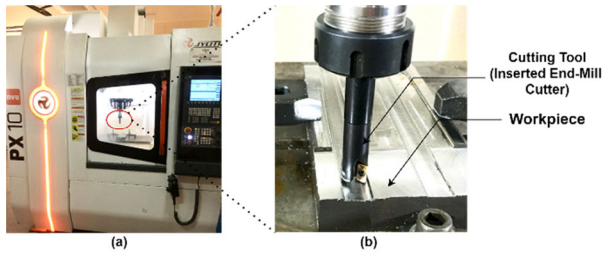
Milling setup (a) Milling machine (b) Milling process (cutting tool and workpiece).
